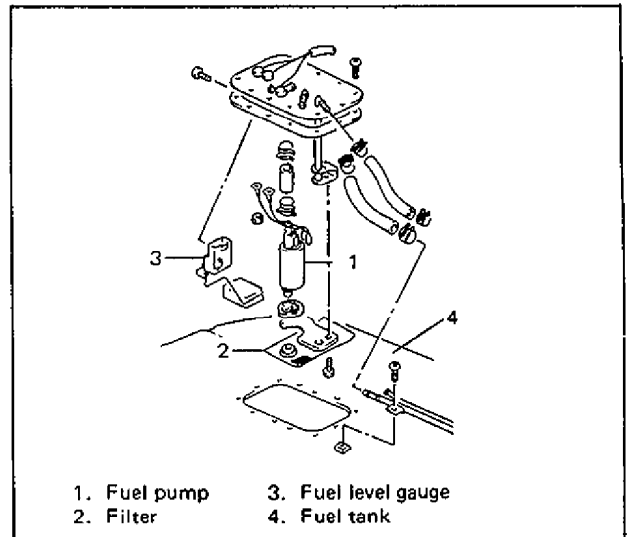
E-99 Removing Fuel Pump & Level Gauge
